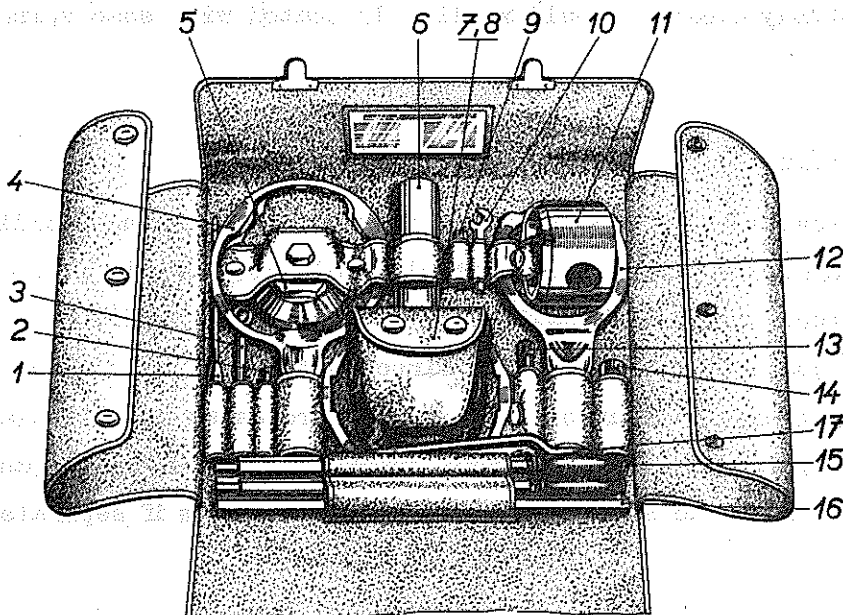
Service tool kit of the VJ 6.506 airscrew unit
